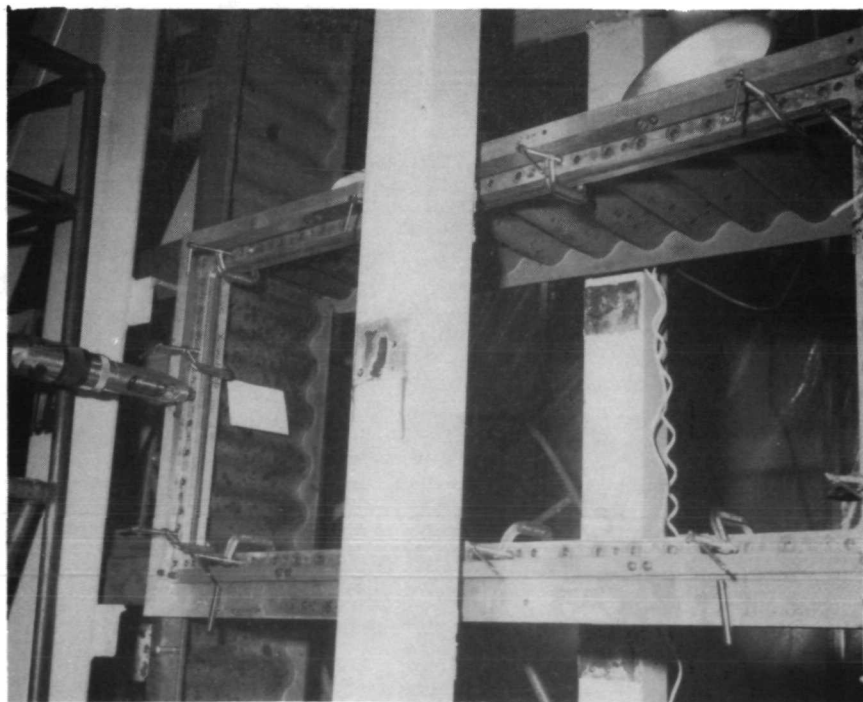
Multiple Use Drill Plate in Position with Power Air Feed Drill Used to Drill Panel Holes Through the Rib and Spar Caps
